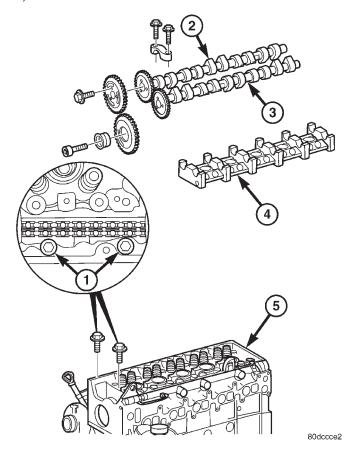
CAMSHAFTS AND HOUSING ASSEMBLY
